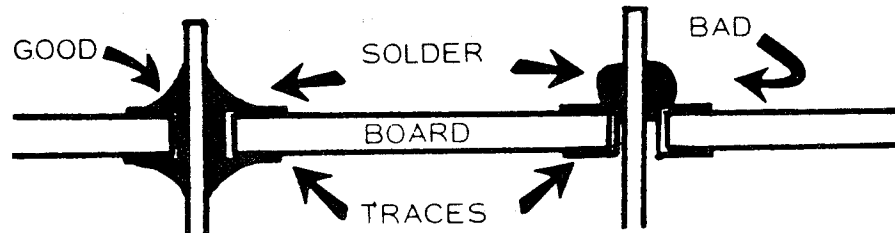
CROSS-SECTION OF A PC BOARD SHOWING GOOD AND BAD SOLDER CONNECTIONS
